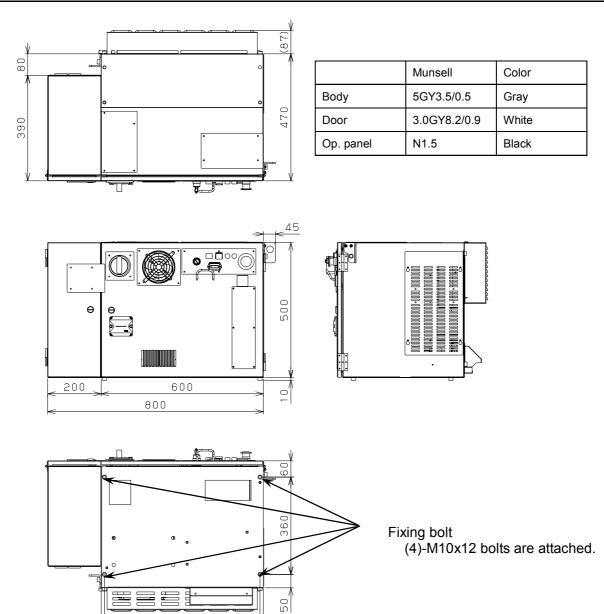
(c) External dimensions (A-cabinet with Side box) (R-30iB Controller)
